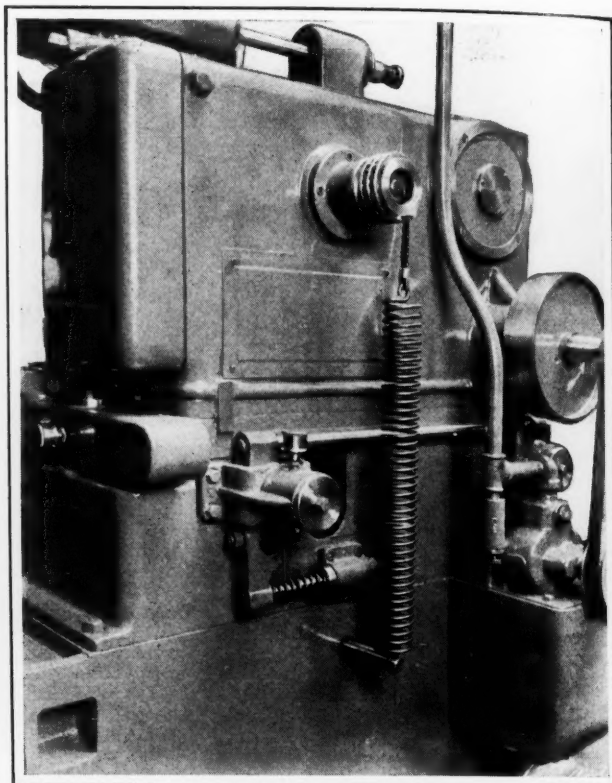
Arrangement of the Special Relieving Mechanism on the Fellows Gear Shaper
